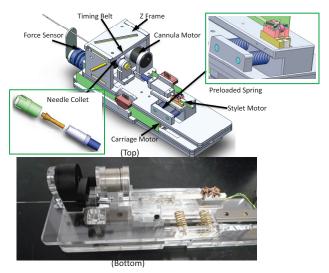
(Top) CAD model of 3-DOF needle driver with the left corner depicting the universal clamping mechanism and the right corner depicting the needle loading mechanism and (bottom) needle driver physical prototype.
